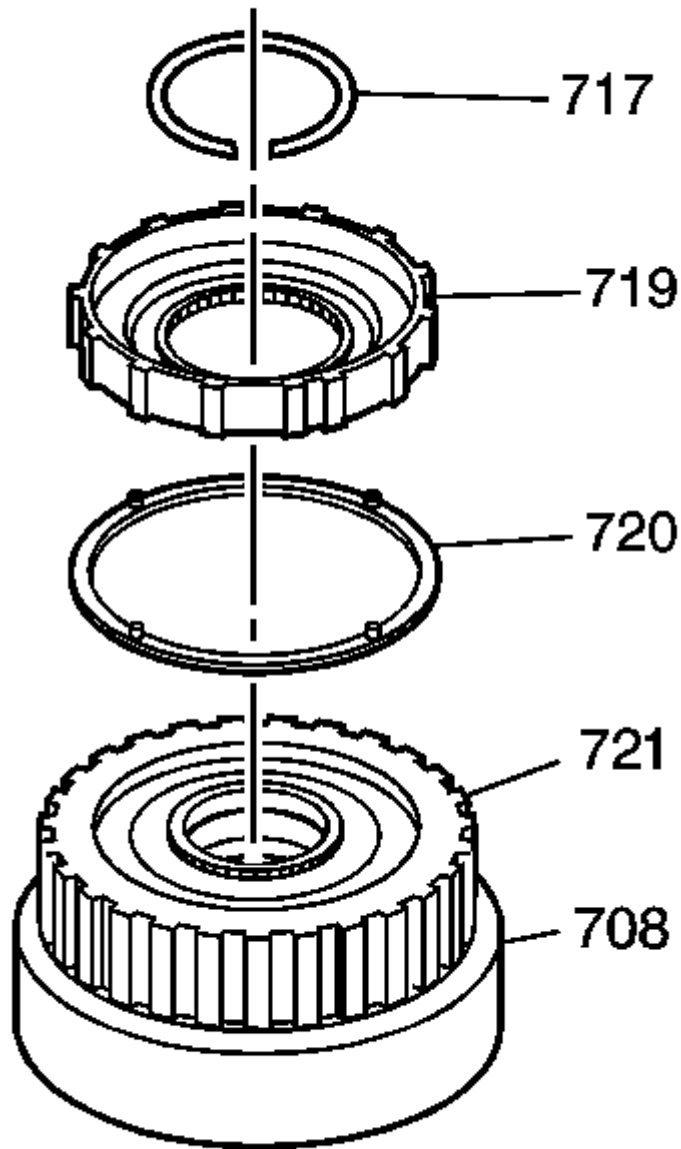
View Of Thrust Washer On Coast Clutch Hub, Input Internal Gear Flange And Snap Ring
